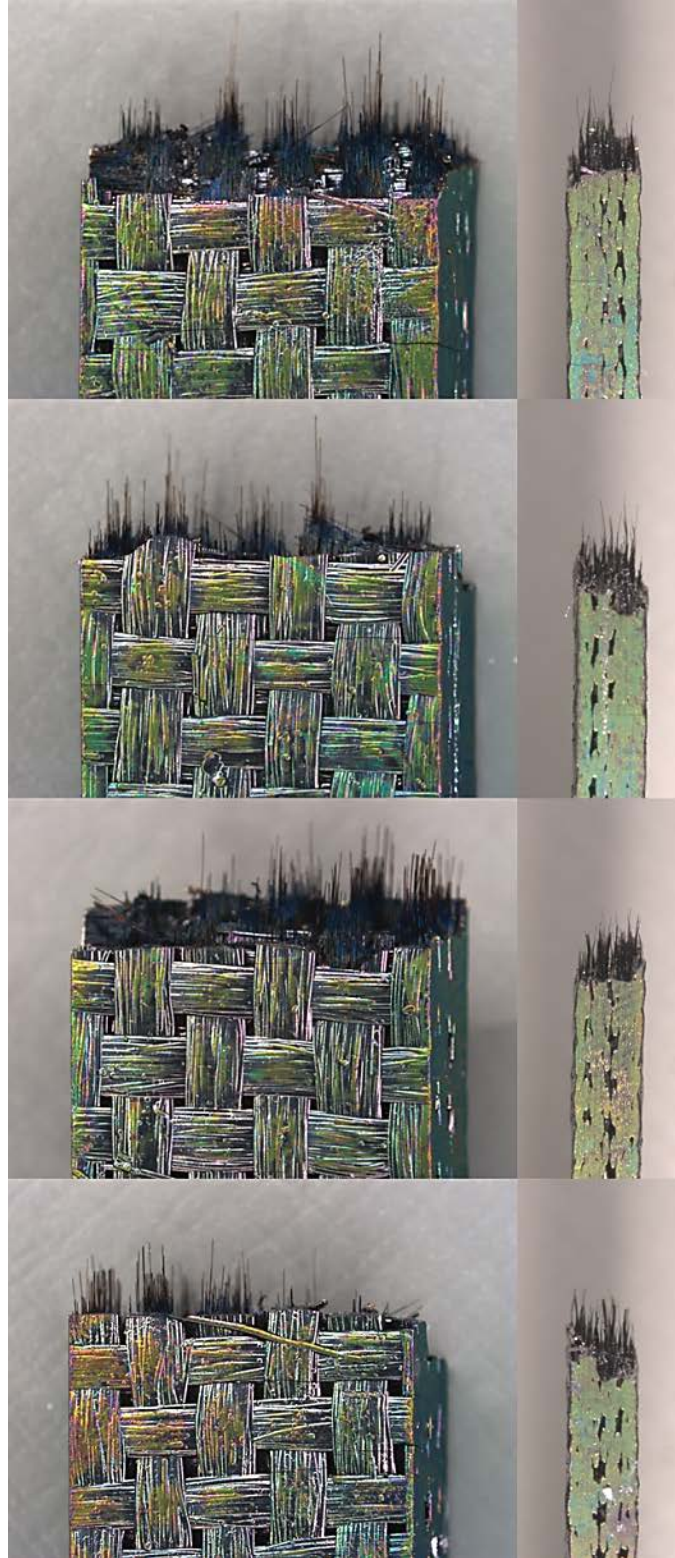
Fracture surface of the specimen tested in tension to failure at 1300 °C in air, 0.05 mm/s.
